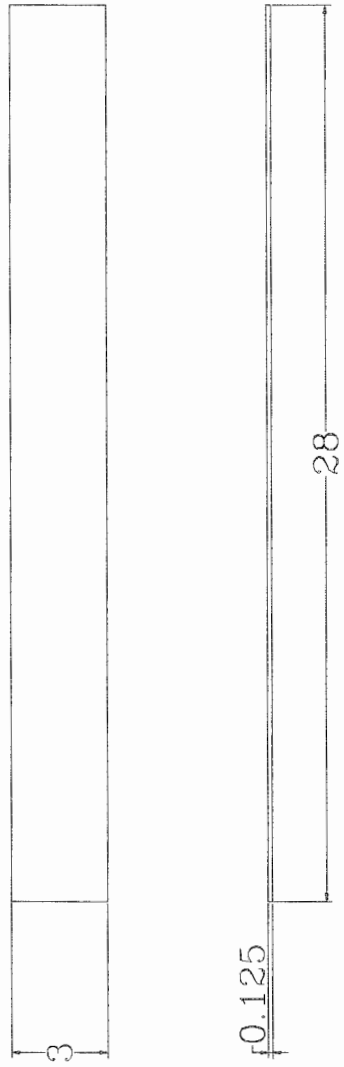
Part No. 17 U Shaped Portion Angle Supports
